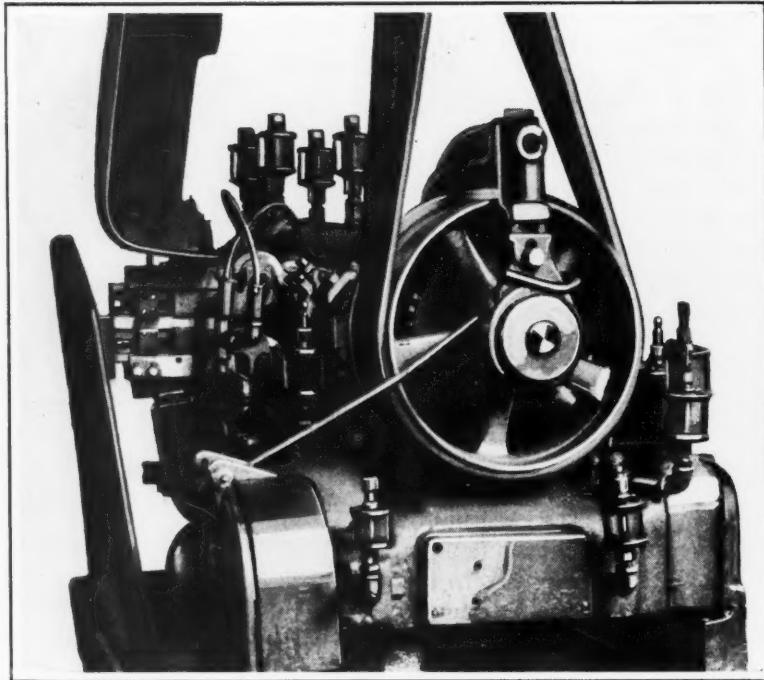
Screw Machine Arranged to Machine Four Parts at One Time
